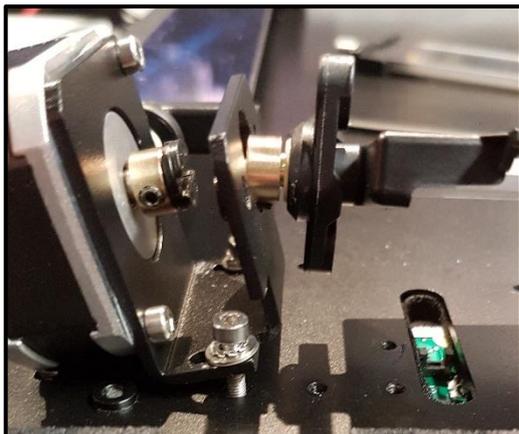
INCLINE THE STEPPER MOTOR SUPPORT
